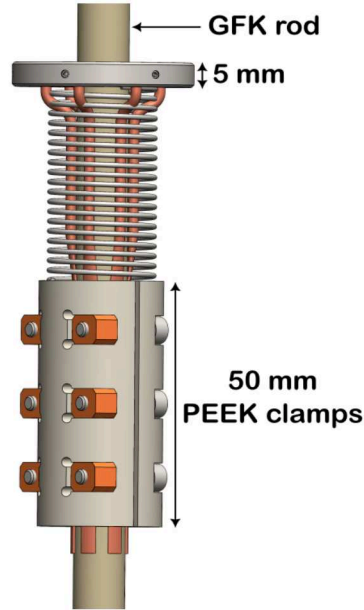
Thermalization components attached to the rod assembly. A 5 mm thick aluminum plate is attached to the fiberglass rod with a PEEK clamp. Copper braids are attached to the plate with screws and the PEEK clamp secures them to the rod. The spring is simply placed on the clamp which then compensates for the contraction in cold temperature and reliably presses the aluminum plate against the HD-EBIT 50 K shield to ensure thermalization.
